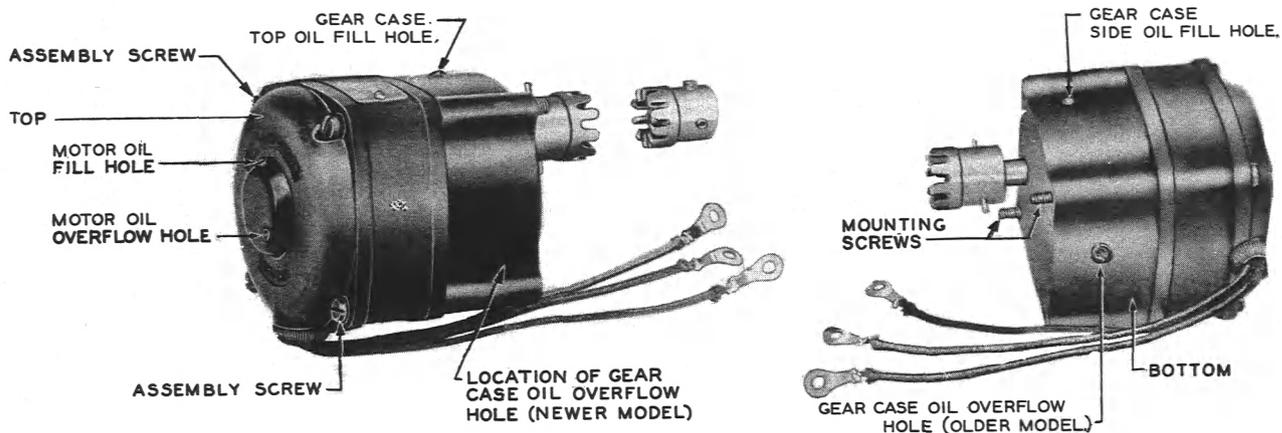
KS-5559, Lists 1 and 6 Motor (Holtzer-Cabot Shown)
